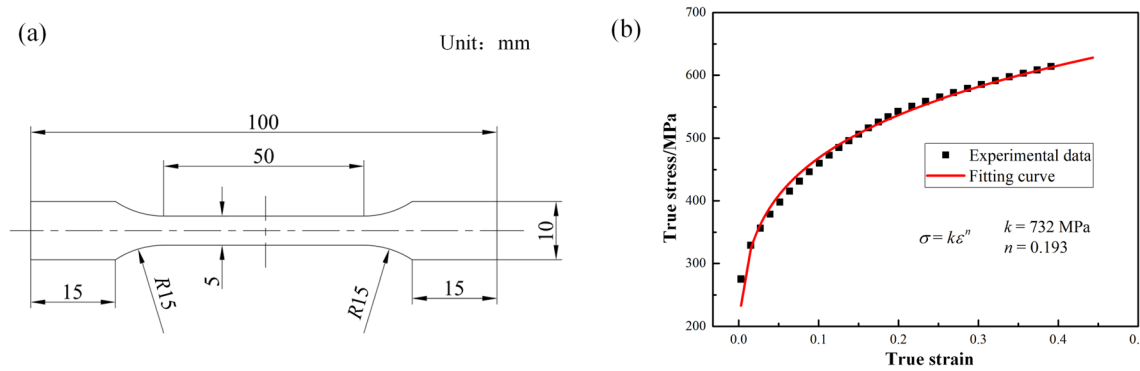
Uniaxial tensile specimen (a) and flow stress–strain curve (b) of stainless steel SS304 tube
